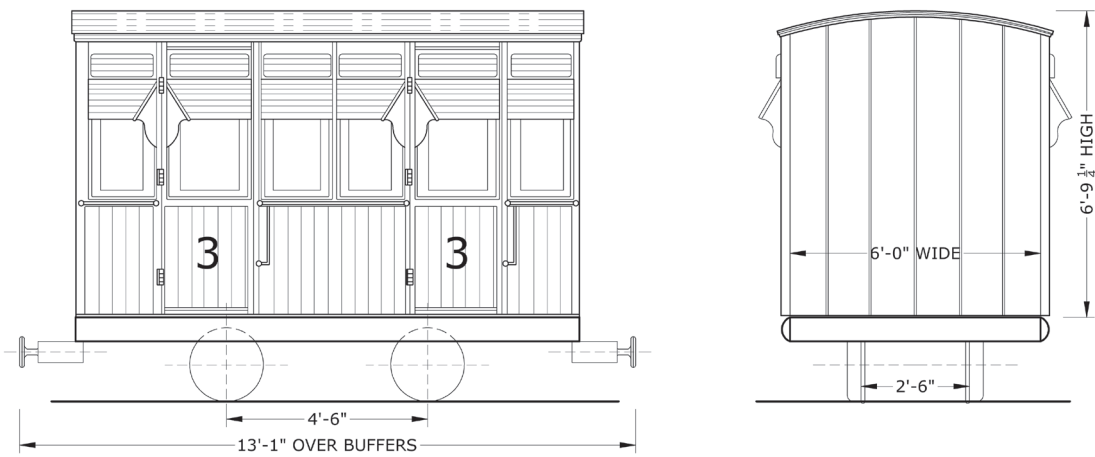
Four Wheel Third Class Passenger Carriage UPR - (TCU)
